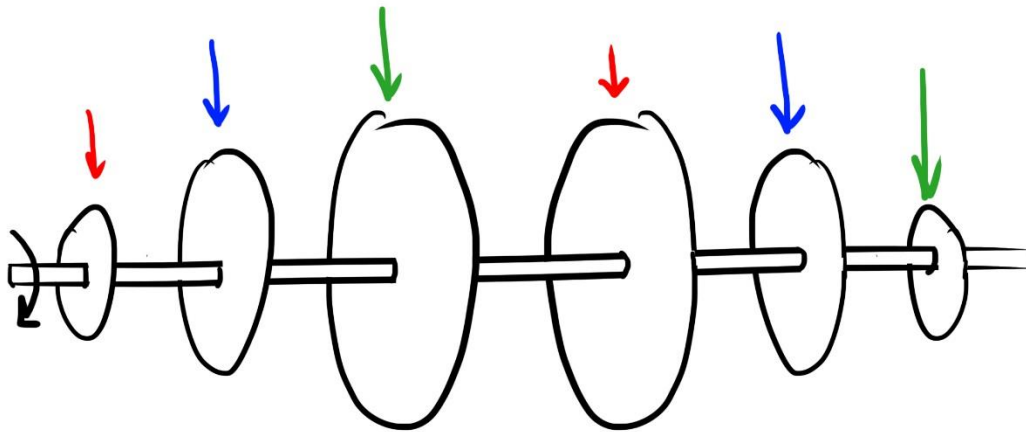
Cam Shaft/Baby Doll Turning Mechanism
